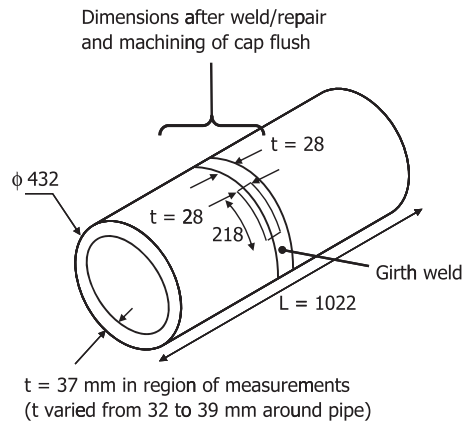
Arrangement of stainless steel pipe girth weld with repair weld, dimensions in mm. Reproduced from Hossain, S., 2005. Residual stresses under conditions of high triaxiality. PhD Thesis. UK: University of Bristol.
